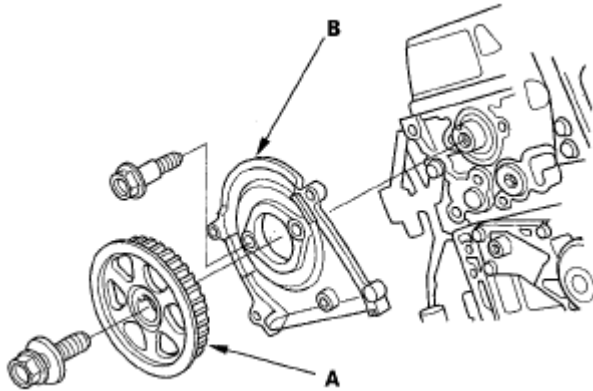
Identifying Front And Rear Camshaft Pulleys And Back Covers
